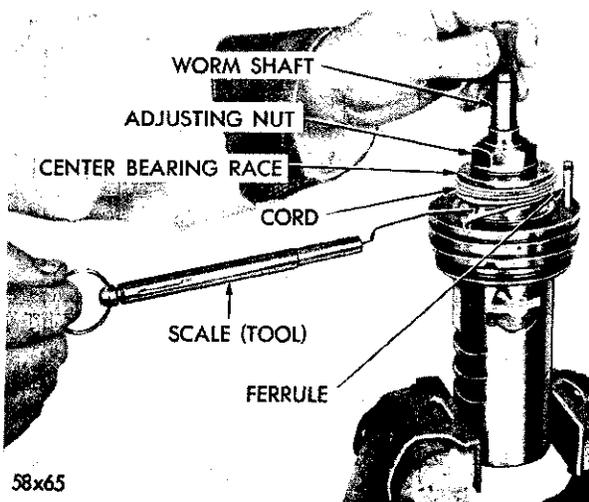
Adjusting the Center Bearing Race Pre-Load
